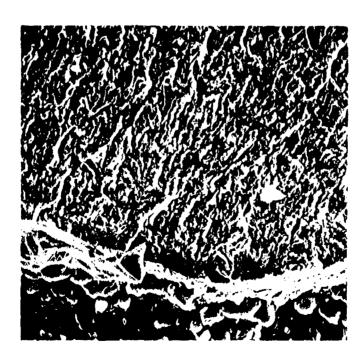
Origin of failure of a temper-embrittled A-514 weldment containing LOP, 1400x.
